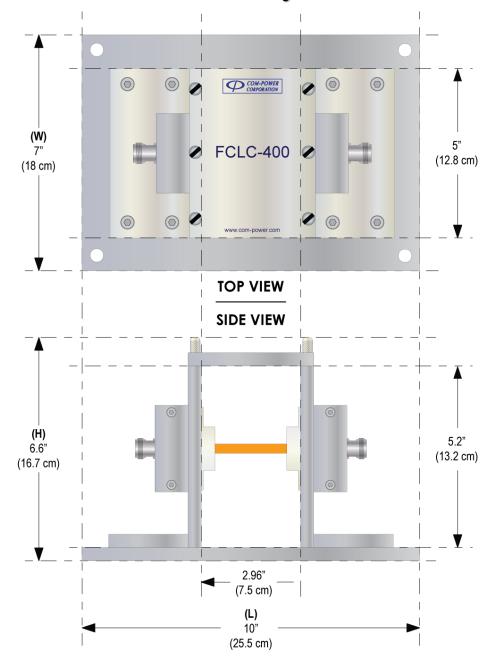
FCLC-400 Calibration Fixture Dimensions
